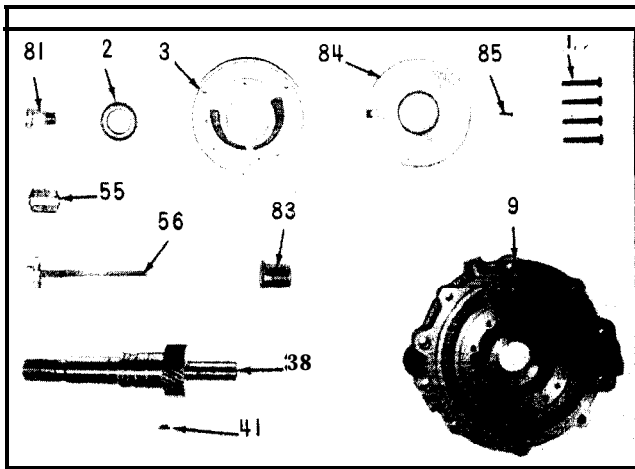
Parts Display for Forward & Reverse ASI-70B & ASI-71B Transmissions. Only Those Parts Different from the ASI-70C & ASI-71C Assembly Are Illustrated.
